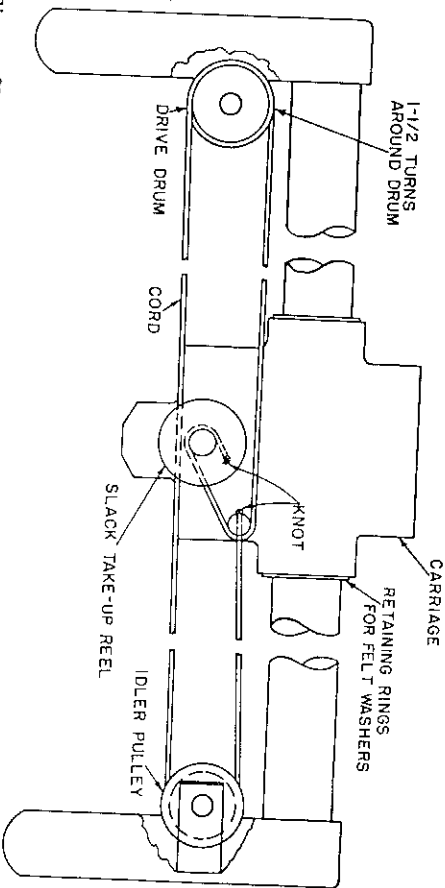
Backview of drive mechanism showing arrangement of nylon cord.
